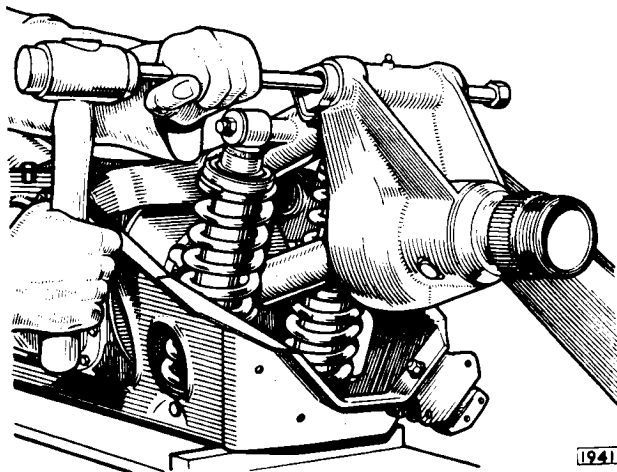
Drifting out the wishbone outer fulcrum shaft
